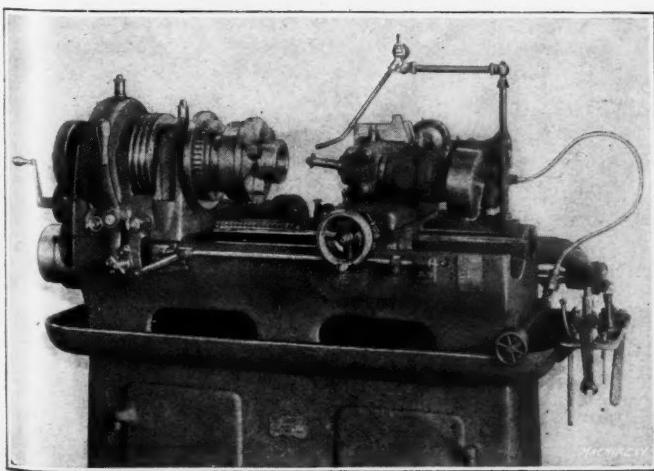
Pratt & Whitney Internal Thread Milling Machine
